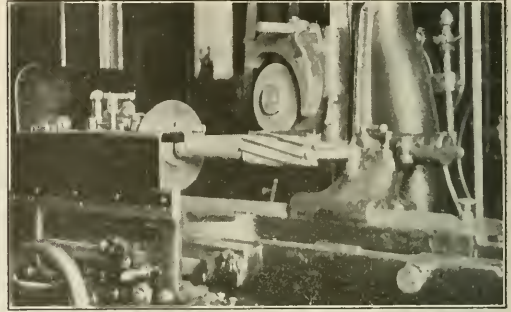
Tool Room Grinder Sharpening Spiral Milling Cutter
